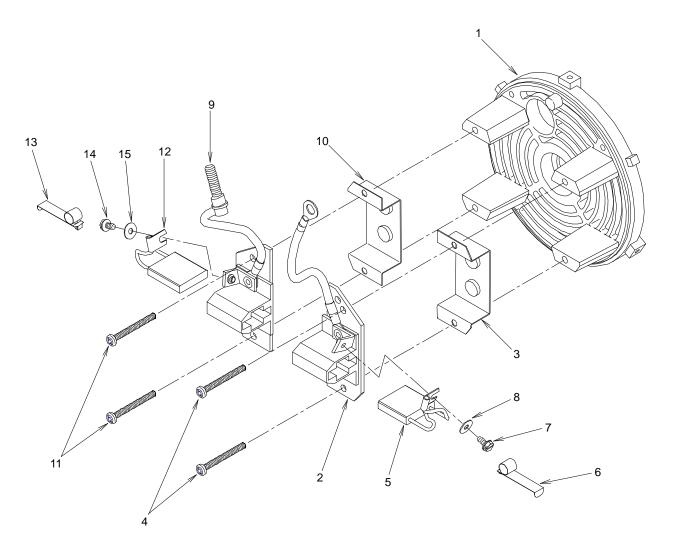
End Bell for Large Frame Generators, Earlier Version
